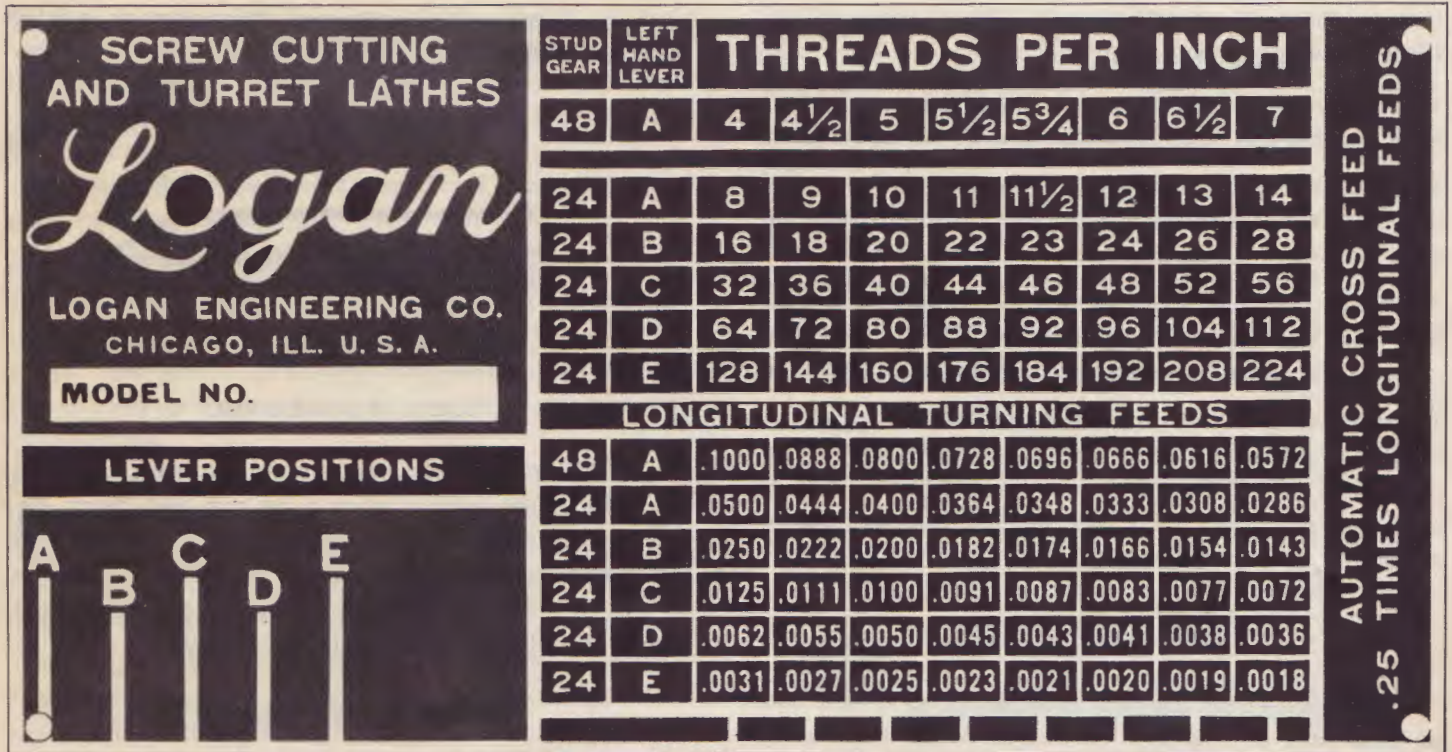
THREAD AND FEED CHART ON LOGAN QUICK CHANGE GEAR LATHES
